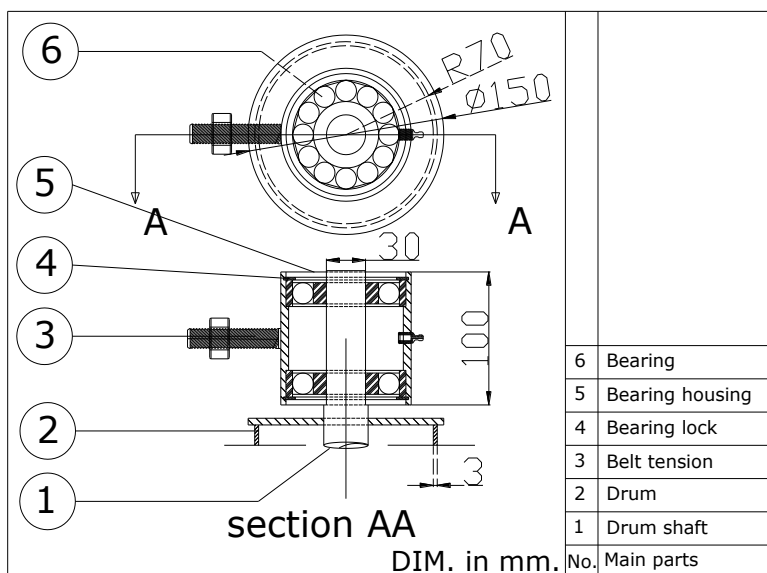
Drive and driven drums bearing housing and conveyer tension.
